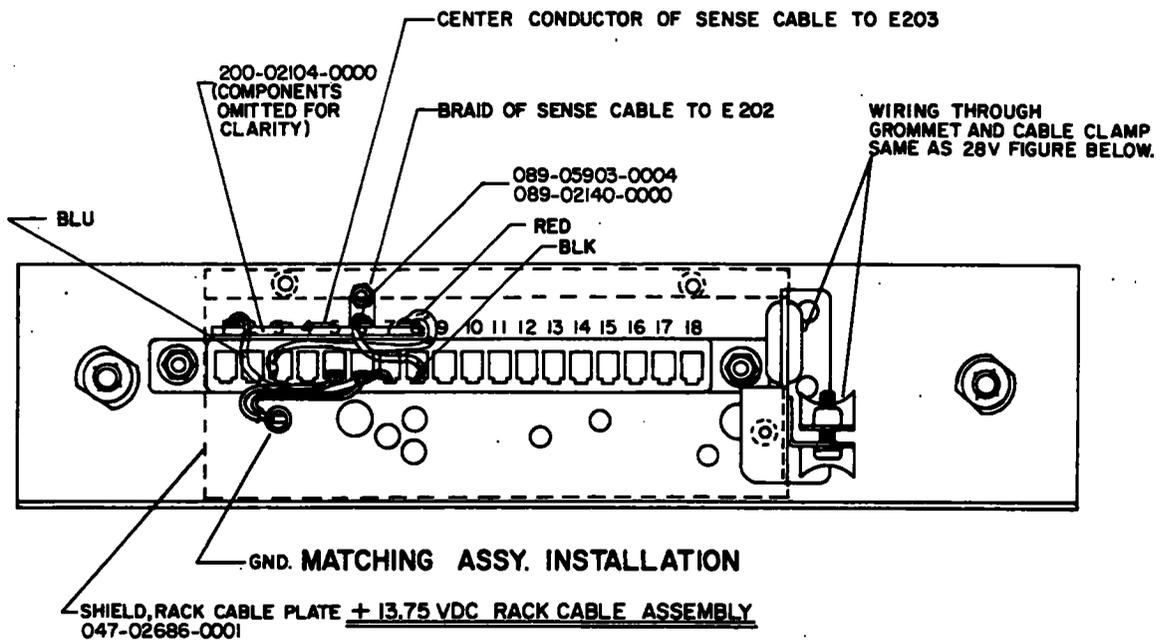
CONNECTOR PIN WIRING FOR KR 86 MATCHING ASSEMBLY
